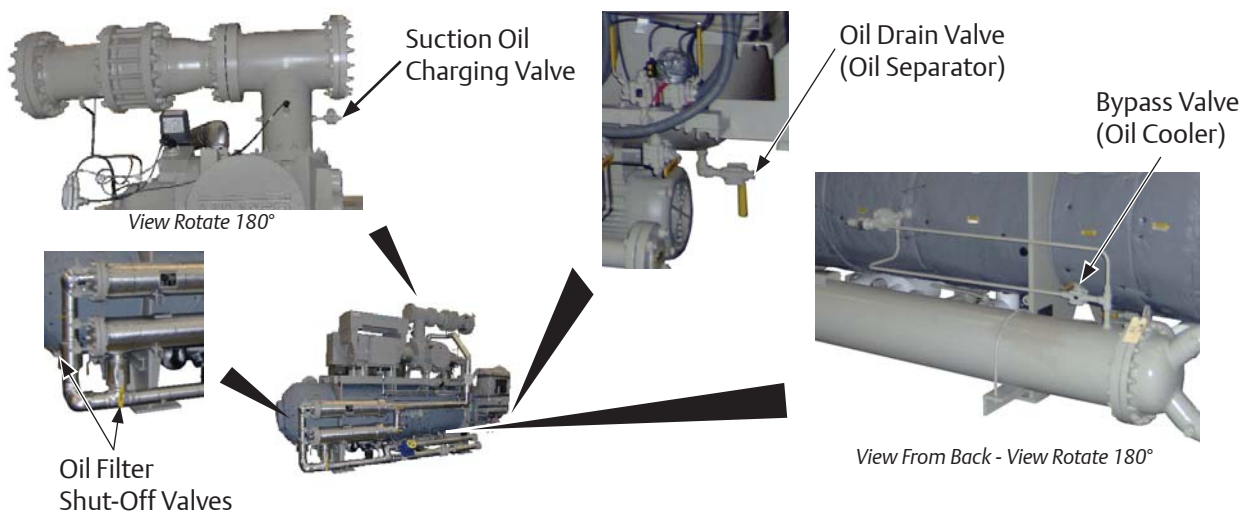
Suction Oil Charging Valve, Oil Cooler Drain Valve and Oil Filter Shut-Off Valves
